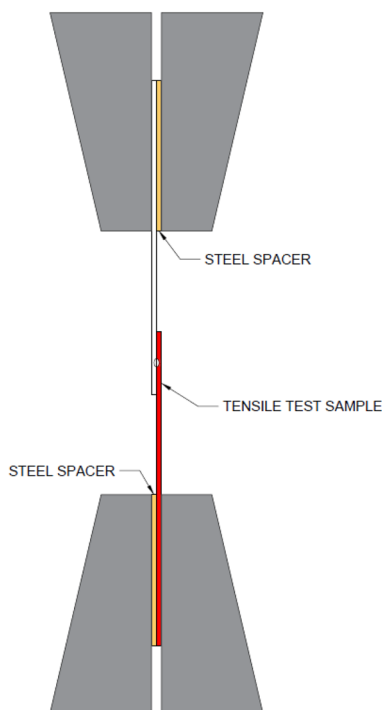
Tensile shear testing mounting arrangement for weld specimen
